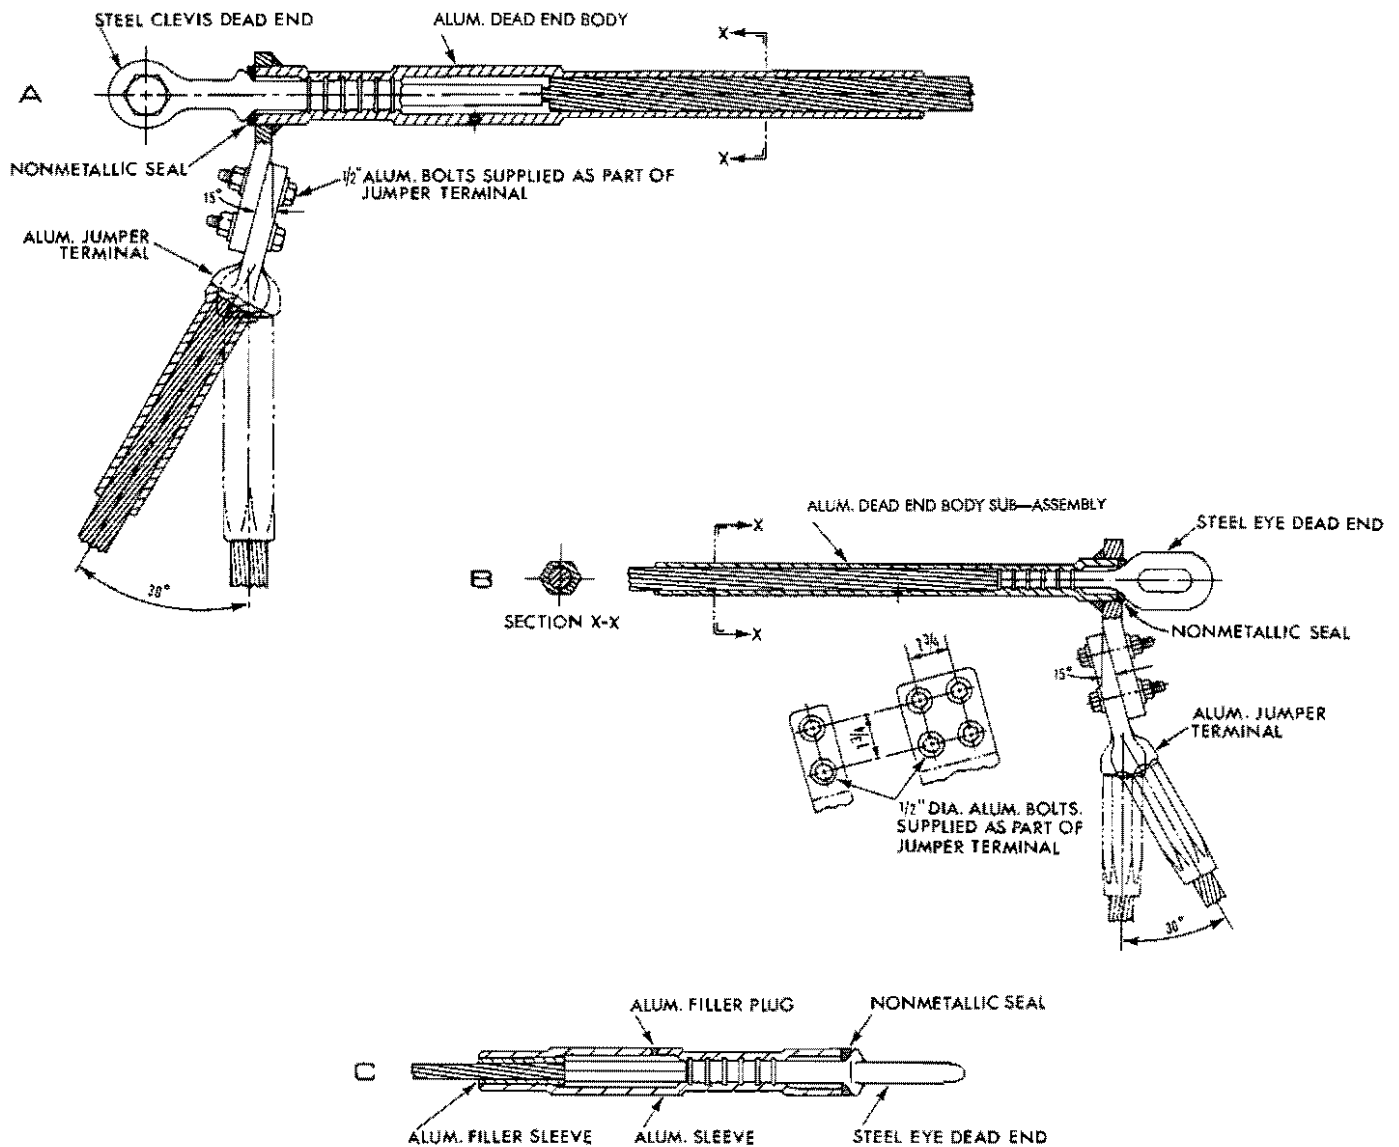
Tubular Aluminum Compression Dead Ends.
